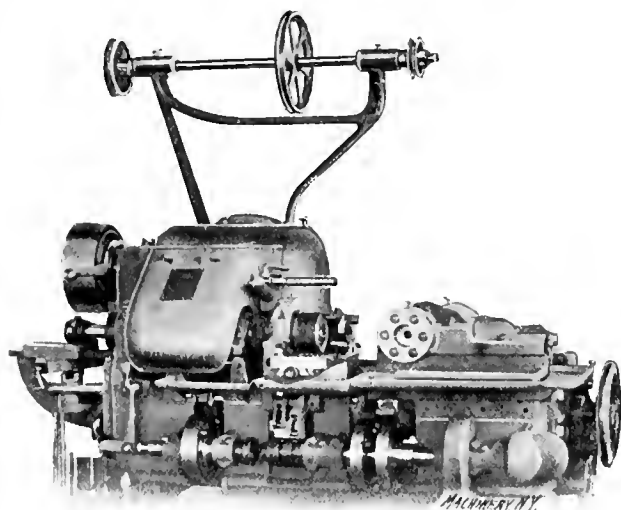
Self-contained Counter-shaft for Driving Attachments.
